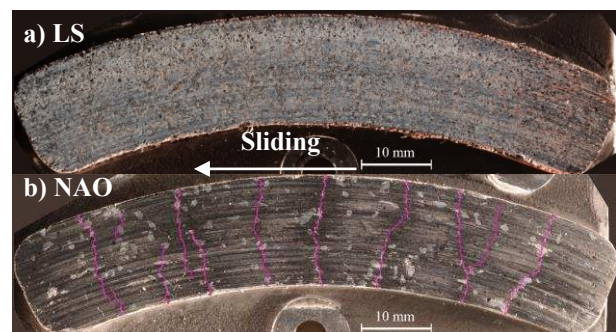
Pads after a braking test. a) LS pad, b) NAO pad. Purple lines show the paths of macroscopic cracks.
